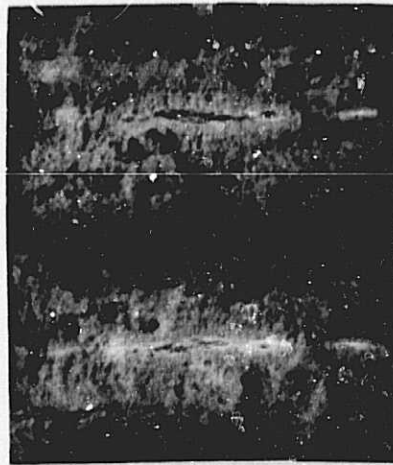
Radiograph and fracture surface macrograph of weld 2219-1.0-3A at IX.
